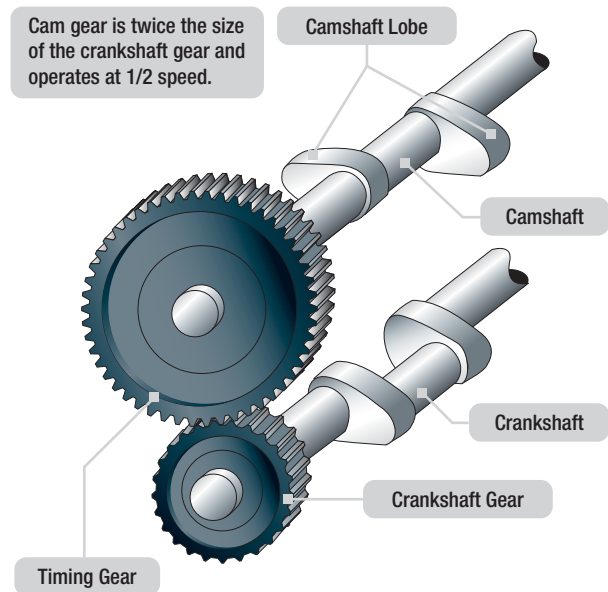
Cam drive mechanism opposed-type aircraft engine.
